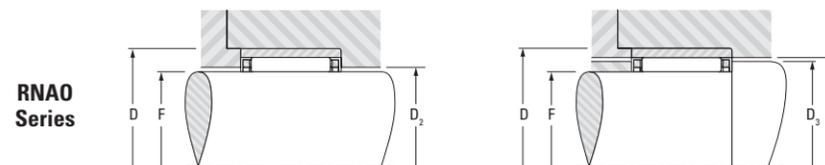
Guidance in the housing (left) and on the shaft (right)
